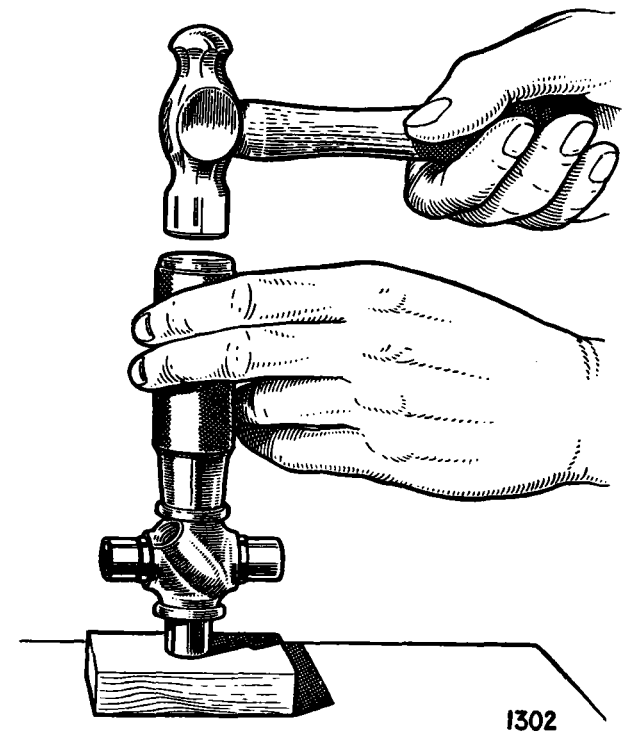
Replacing a gasket retainer with a hollow drift (Early Cars).
